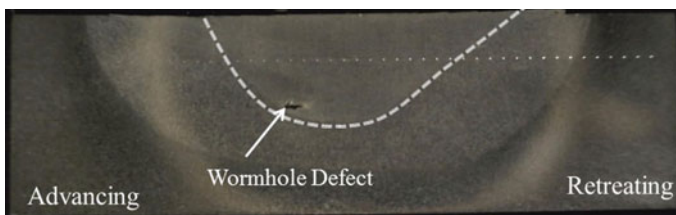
Macrograph showing the cross-section of Mar 250 friction stir weld
